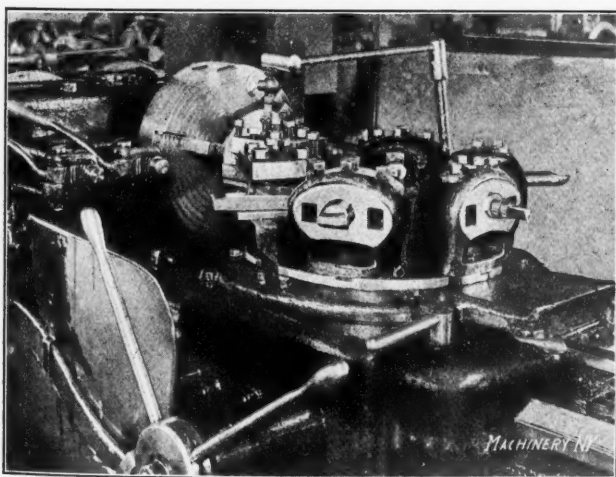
Second Operation on the Flat Turret Lathe, using Special Jaws
